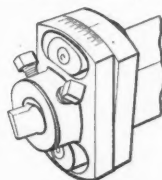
Screw Cutting Tool-holders with Swivel Heads.
